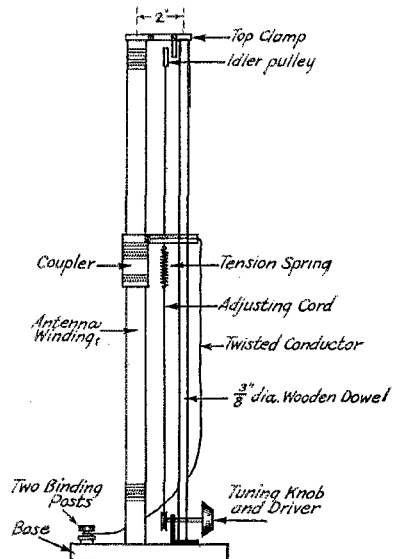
SKETCH SHOWING THE COMPLETE ASSEMBLY
